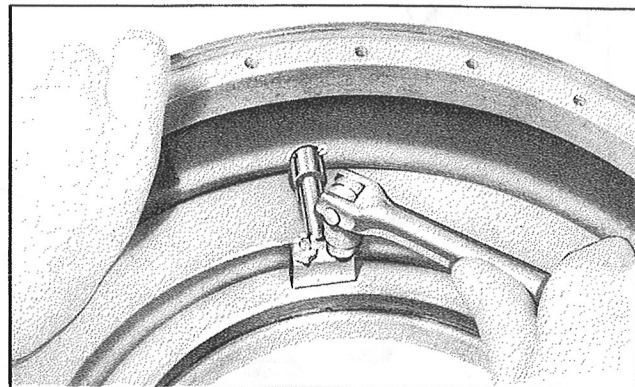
Removal of Check Valve, Models A632S-A1, -A2
